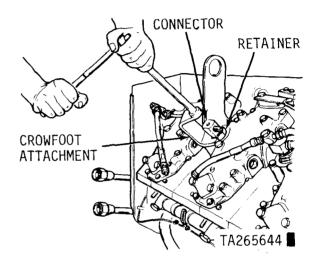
Loosening fuel injector nozzle and holder assembly using crowfoot attachment.
